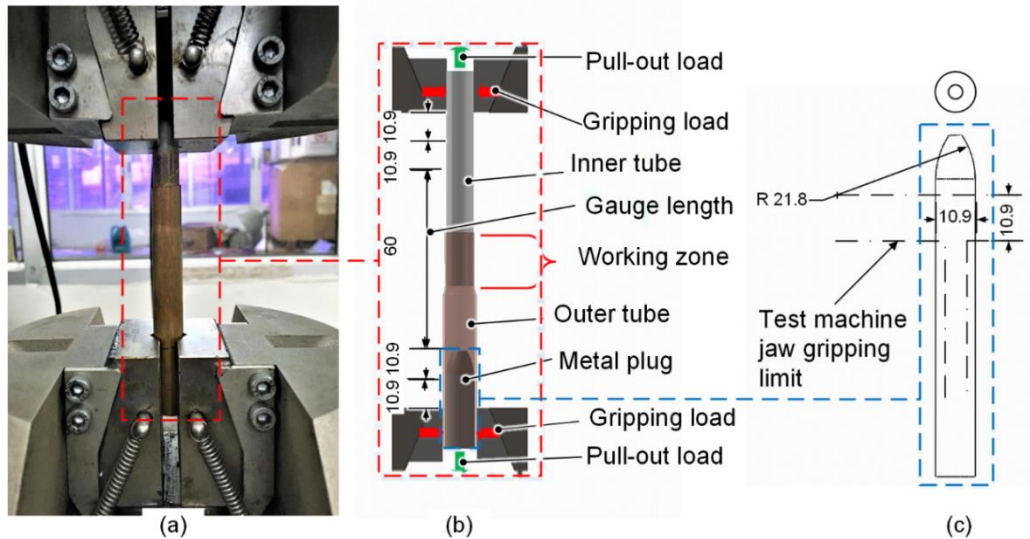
(a) Experimental setup of pull-out/compression test, (b) schematic diagram of pull-out test for Cu-SS tubular joint and (c) metal plug used in the pull-out test
